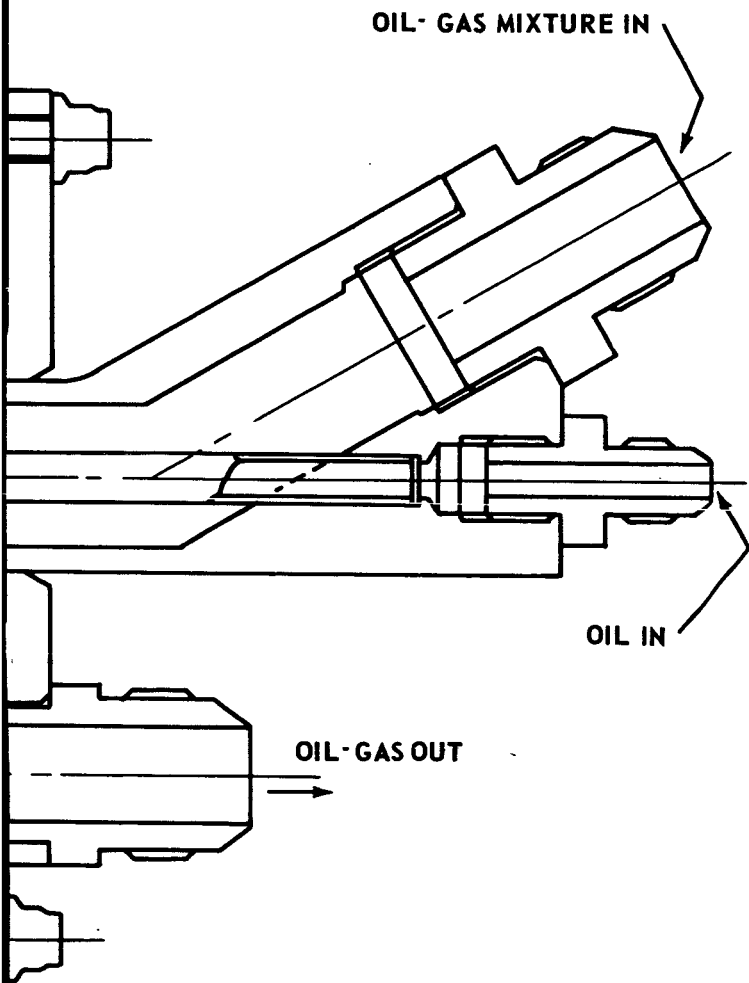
Turbine-Compressor Bearing-Scavenge Rig
